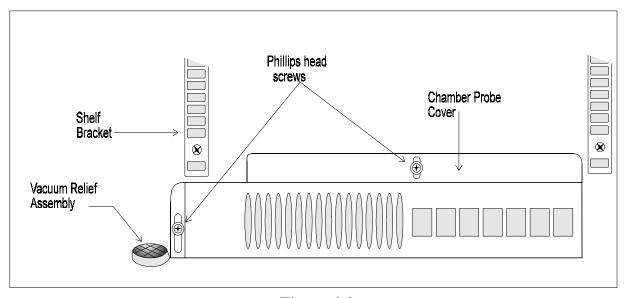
Chamber Probe Cover and Vacuum Relief Assembly
